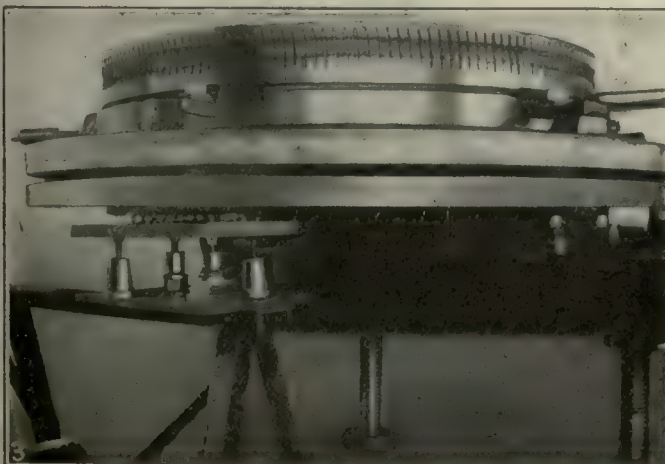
BALL-BEARING SUPPORT FOR OVERHANG
